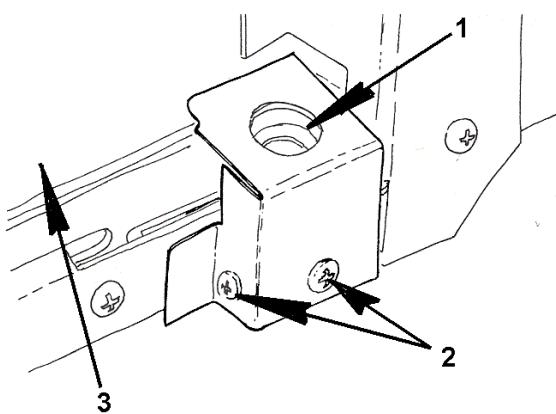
Passenger Entry Door Pivot Bracket (Right Hand shown)
